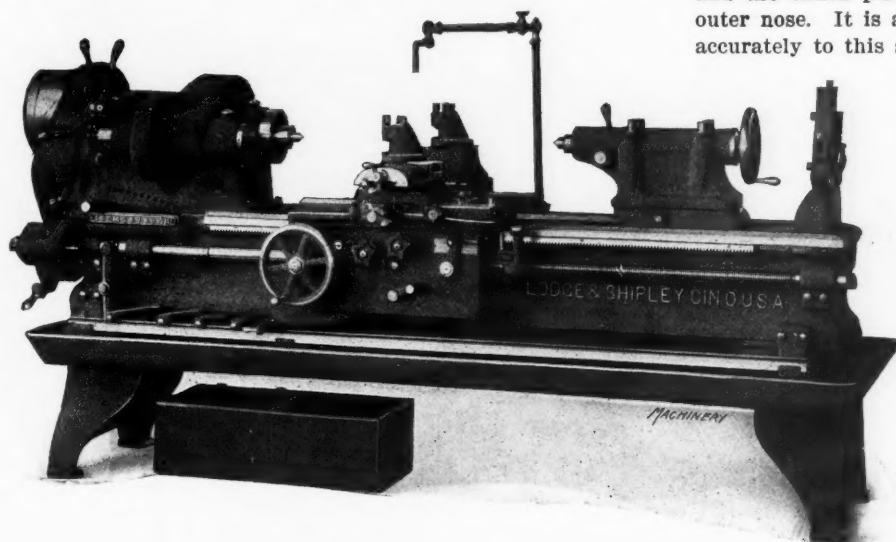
Belt-driven 18-inch Lodge & Shipley Selective Head Lathe
